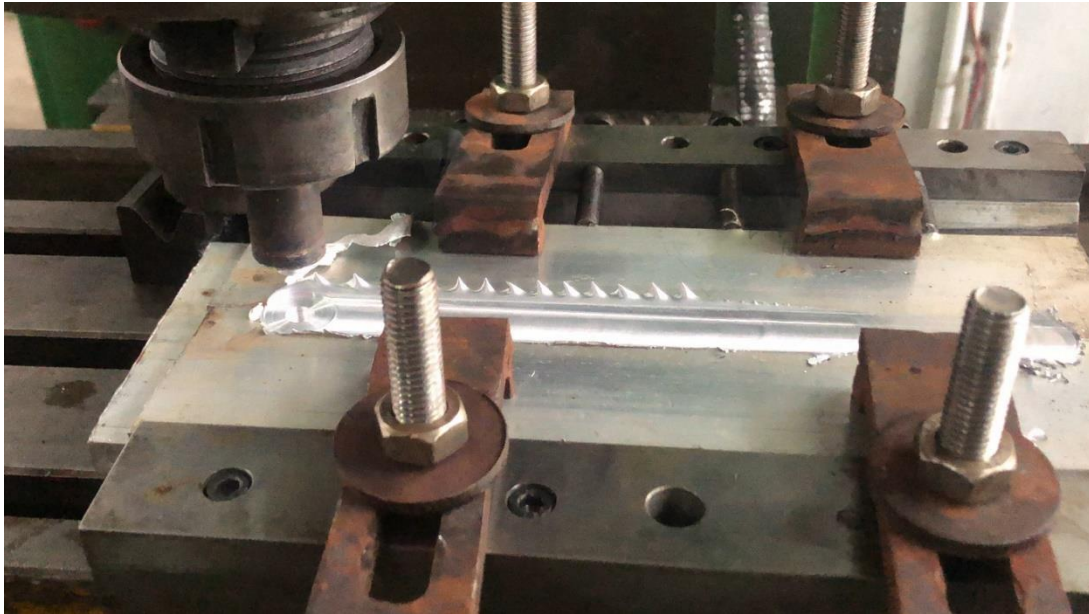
Friction stir welding process of aluminium plates at 2 degree tilt angle
